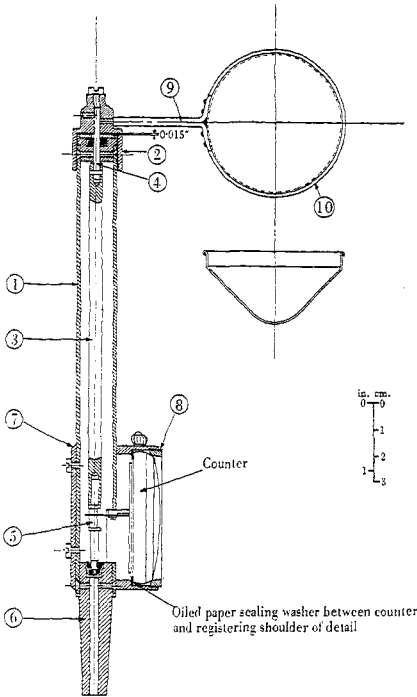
Sectional assembly of three-cup anemometer (one cup only shown)
